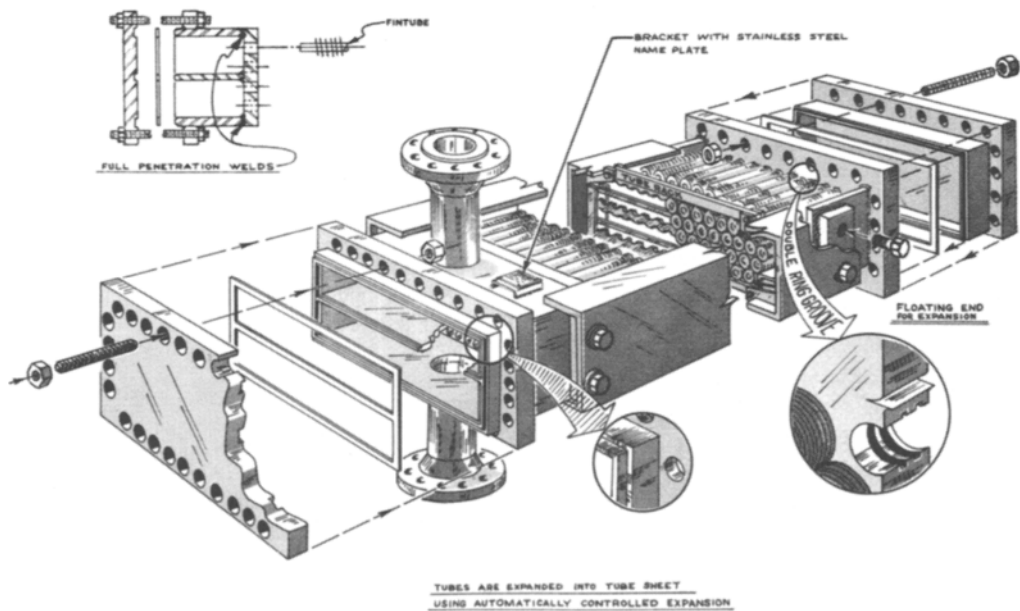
Typical tube bundle using flanged end cover plates. (Used by permission: Yuba Heat Transfer Division of Connell Limited Partnership.)
